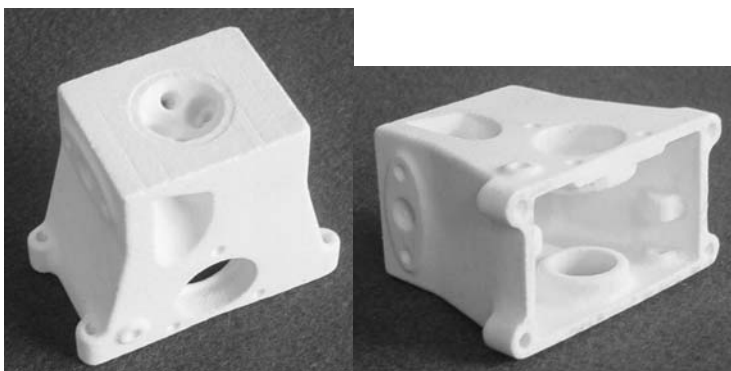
Views of the 3D printing engine head prototype without water jacket
